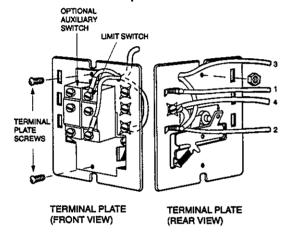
H10 Terminal Plate with Limit and Auxillary Switches
